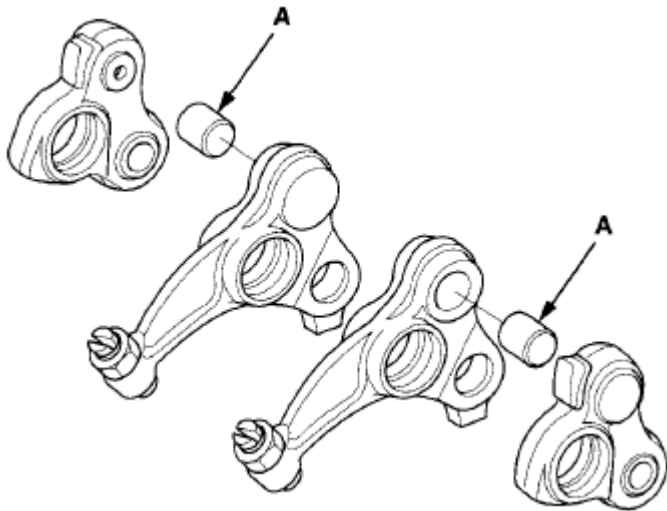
Identifying Rocker Arm Piston - Exhaust
